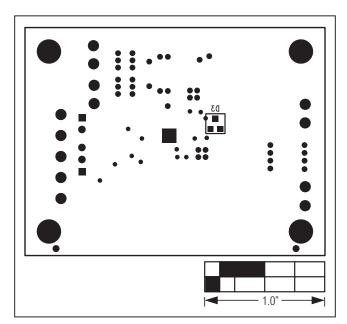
MAX16955 EV Kit Component Placement Guide-Solder Side
